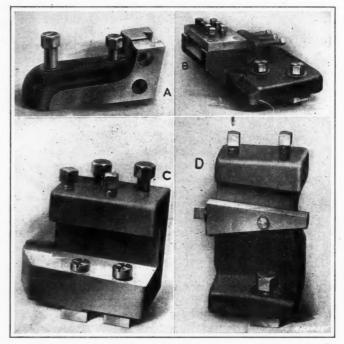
Forming and Cutting-off Tool-holders used on Gridley Singlespindle Automatic Turret Lathe
